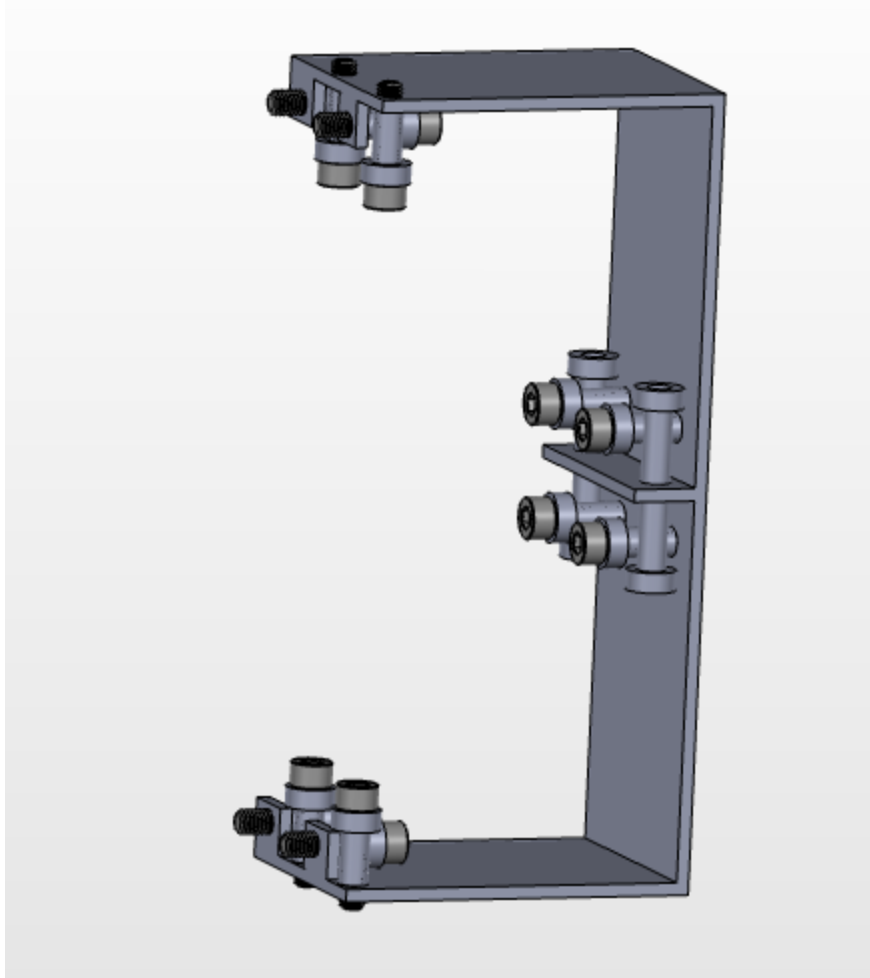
The cleaning unit that I cadded. This shows how the bearings will be placed for the cleaner to roll along the arm.
